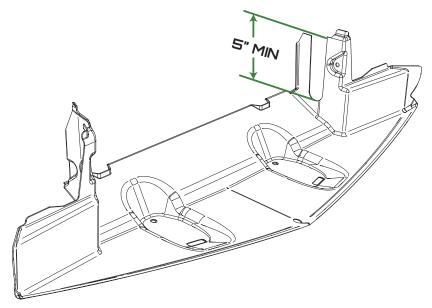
Trimmed Black Plastic Lower Radiator Shroud
